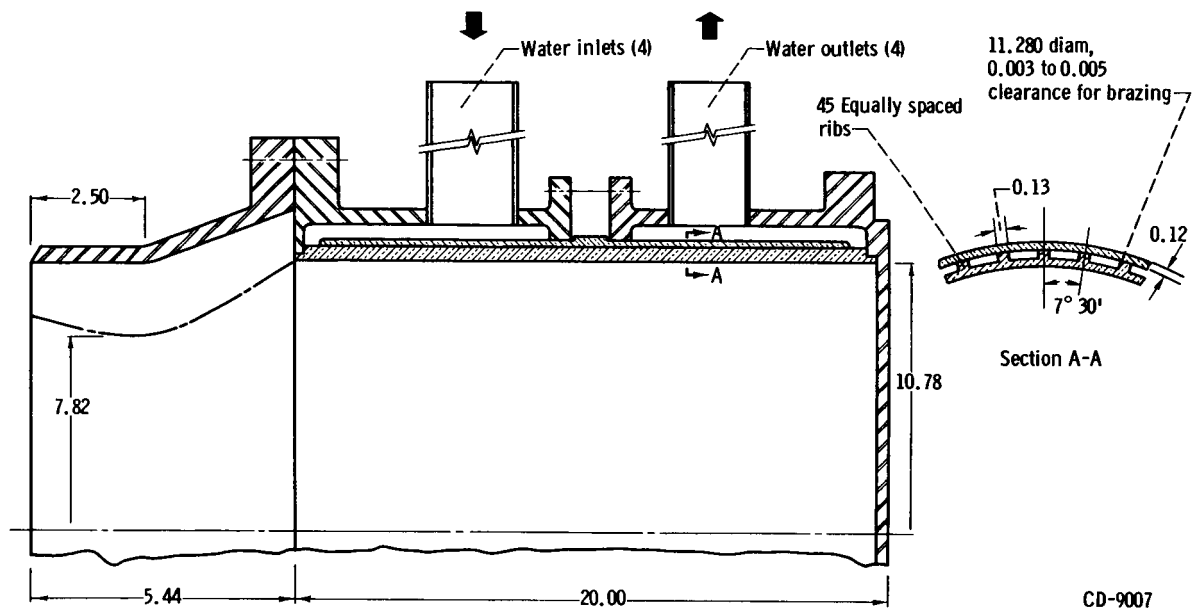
Water-cooled combustion chamber and nozzle assembly. All linear dimensions are in inches. Multiply by 2.54 to convert to centimeters.
